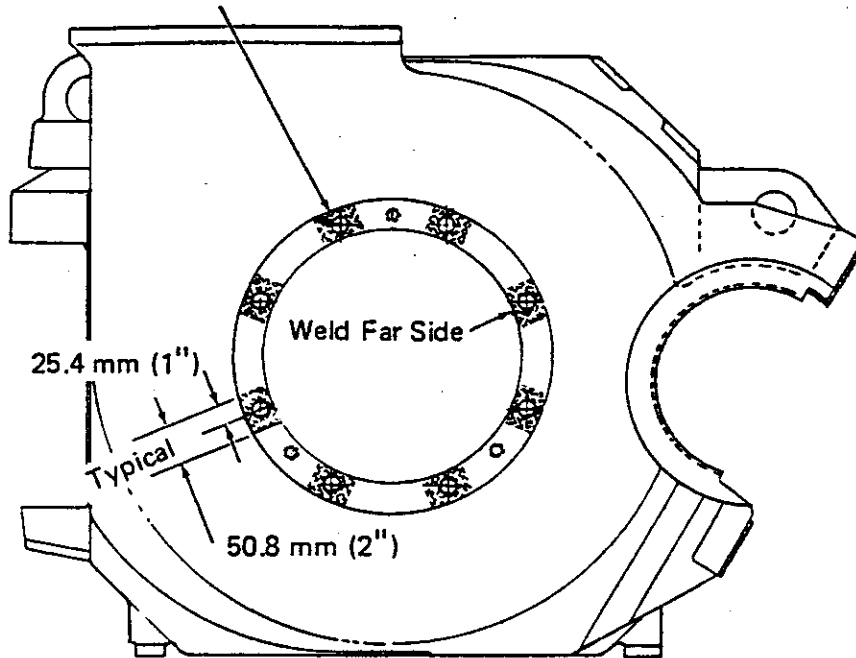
Commutator End Armature Housing Bore Face Weldin
